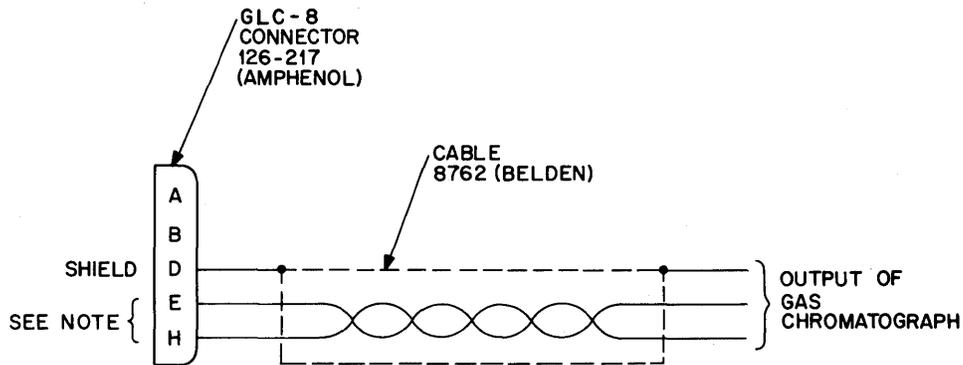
Gas Chromatograph/GLC-8 Cable Assembly, Fabrication Drawing
